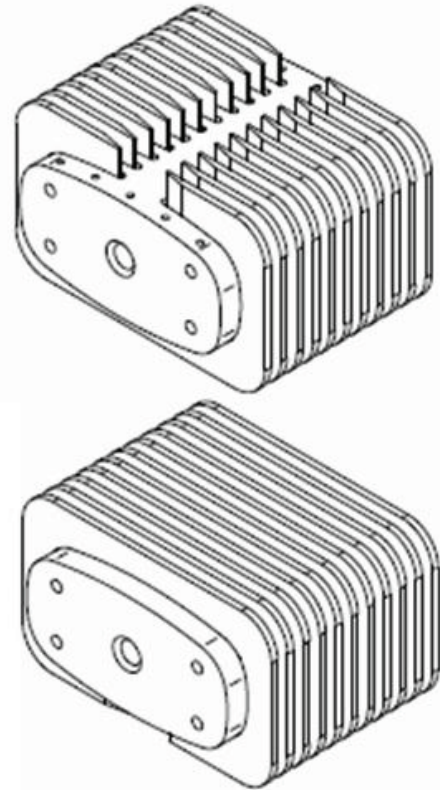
Sketch of the stainless steel coil former of the five periods prototype SCU magnet.
